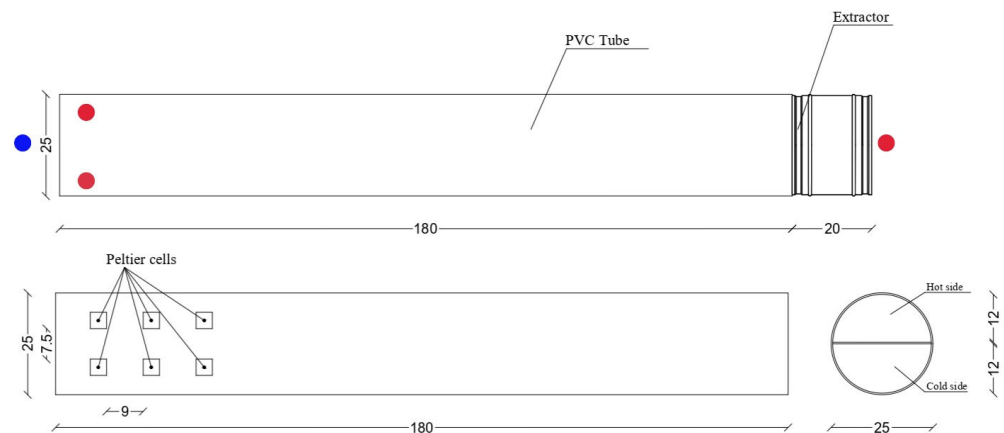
First configuration—technical drawing. Thermo-hygrometric probes in red, hot-wire thermo-anemometer in blue.
